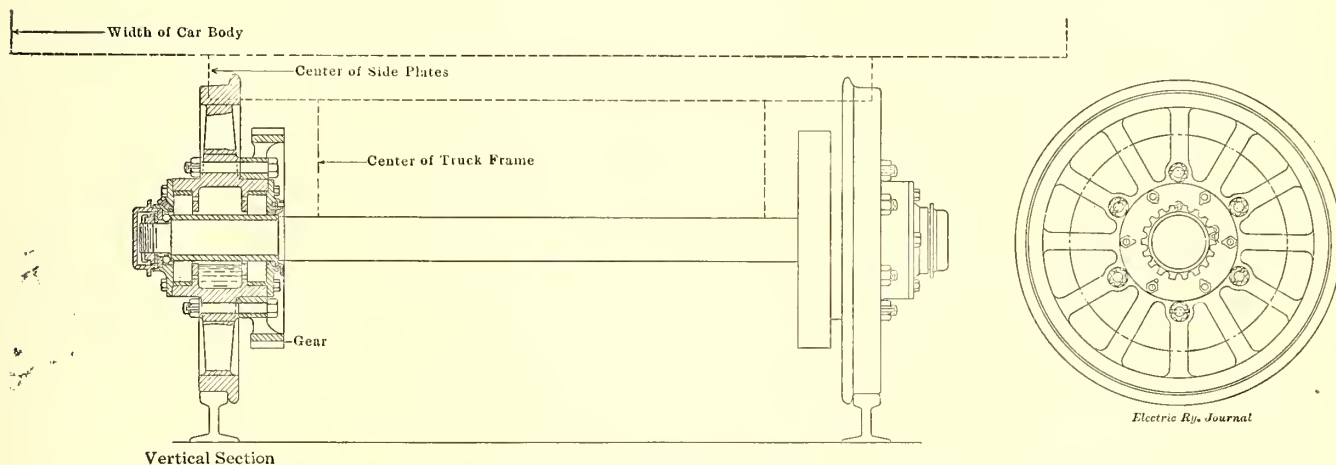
Section, Side View and End View of Roller-Bearing Car Wheel
